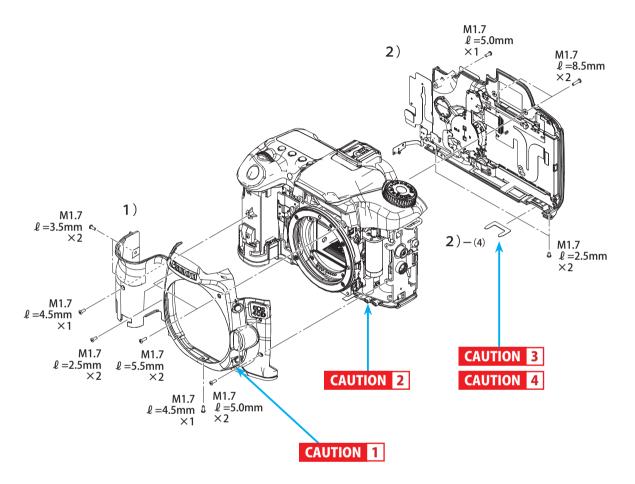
Front Cover Ass'y and Back Cover Ass'y Removal
